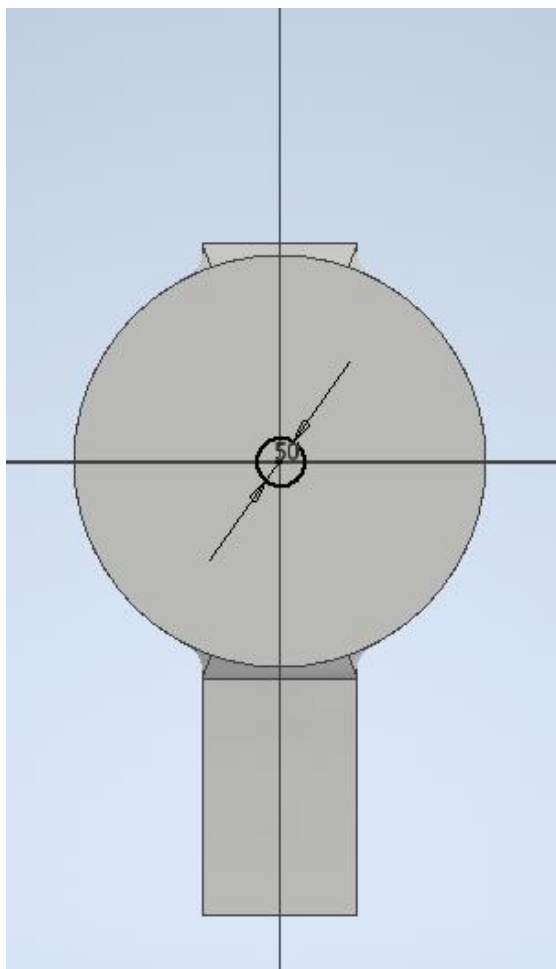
Designing the nozzle-transition piece for the Air outlet
